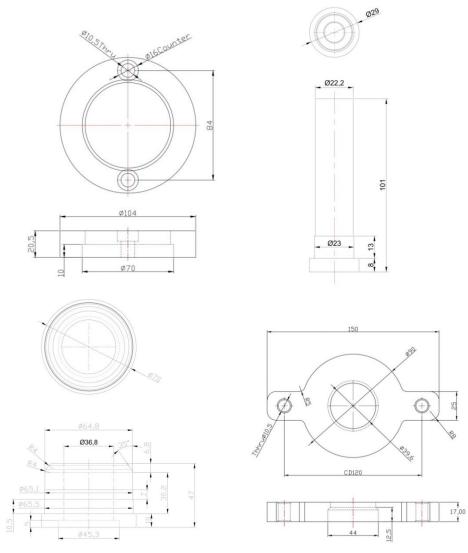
,8,9,10: Design of Blanking die holder, Piercing Punch, Blanking die and Lower stripper plate
